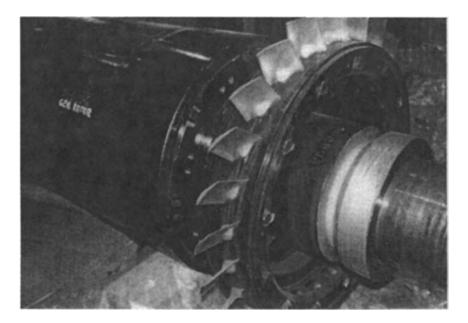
[R04] The fan ring and fan blades of a 2-pole cylindrical rotor. In this design the diameters of the fan ring and blades are larger than the diameter of the bore. Thus, the rotor can only be removed in the direction of the fan unless the fan is disassembled prior to removal of the rotor. Compare this design with the one shown in Figure 5-7.
